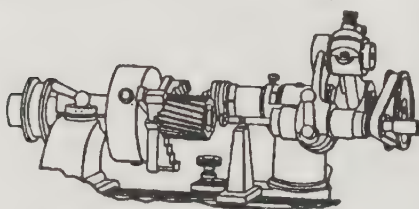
Method of Using the Internal Grinding Attachment, Ready to Grind.
